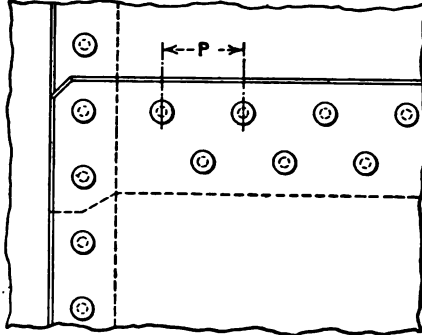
EXAMPLE OF LAP JOINT, LONGITUDINAL OR CIRCUMFERENTIAL, DOUBLE-RIVETED
